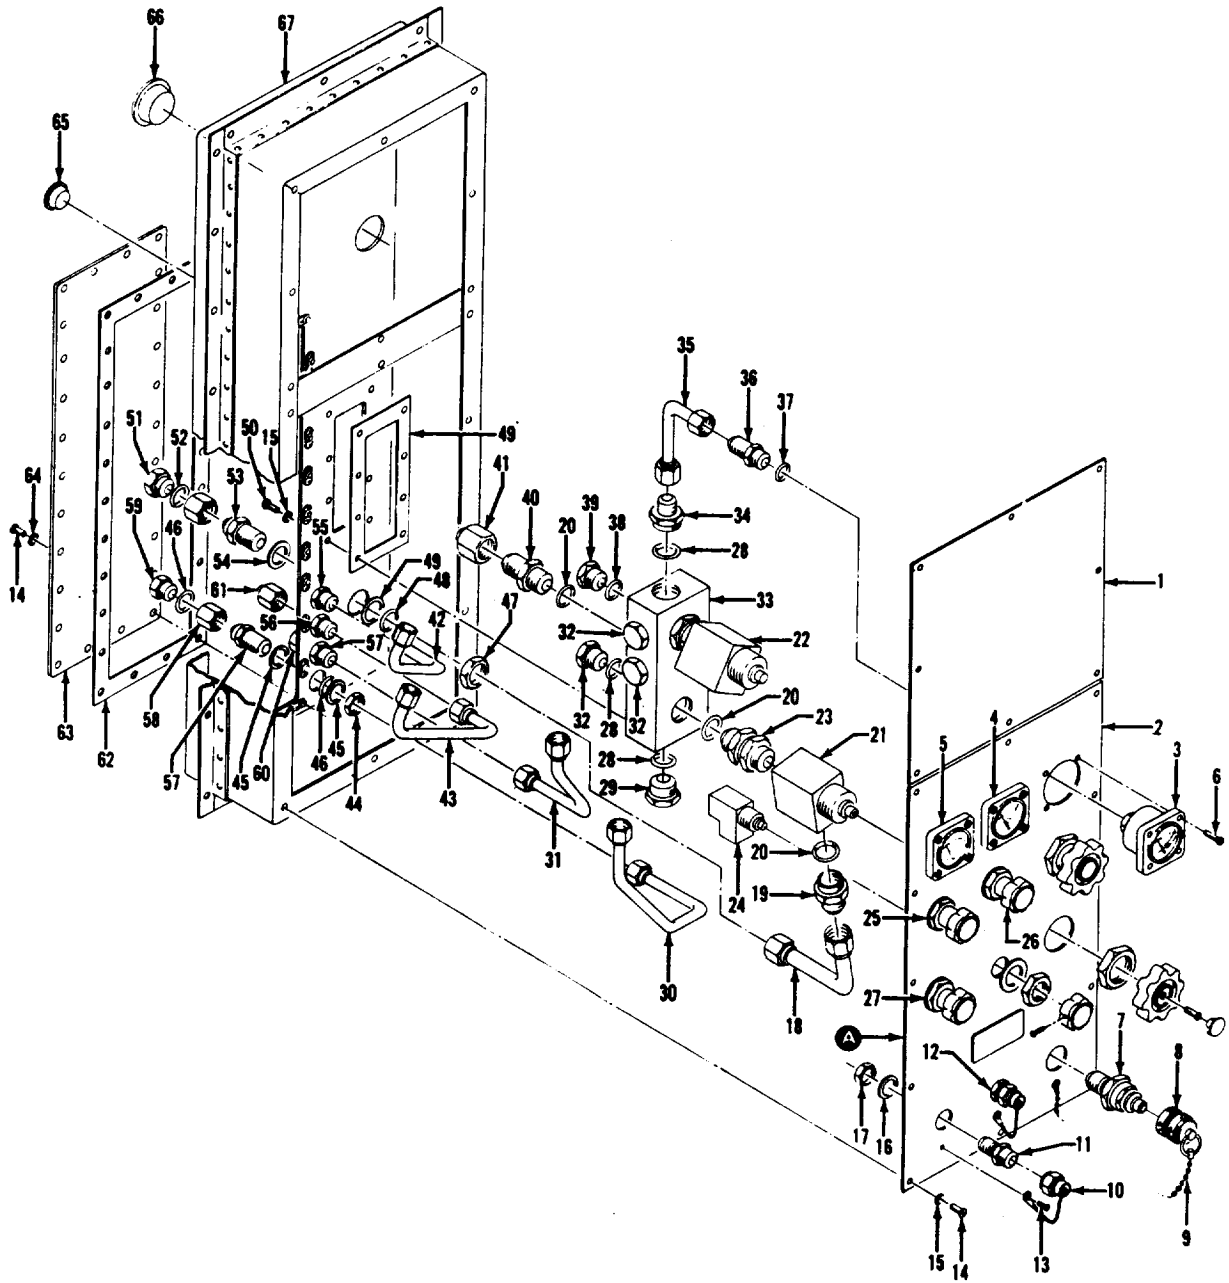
GOX Module Assembly. (Sheet 1 of 4)
